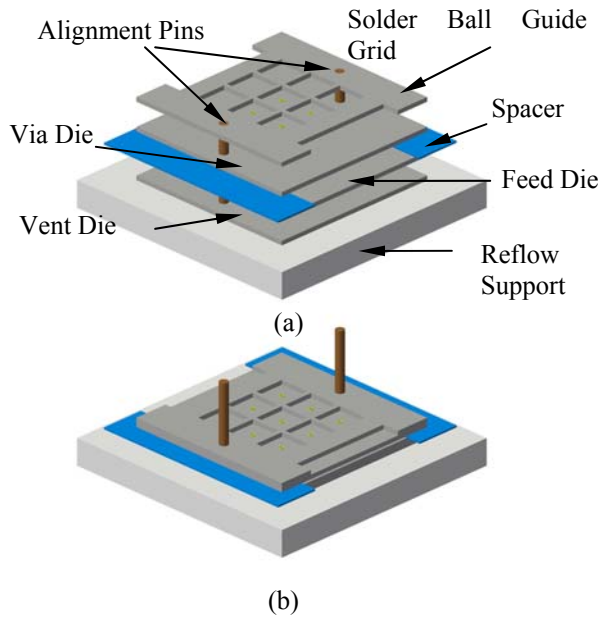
Assembly of solder-pump TWI test structures for reflow: (a) explosion diagram showing all the individual pump and reflow support components, (b) fully assembled test die ready for solder reflow.
